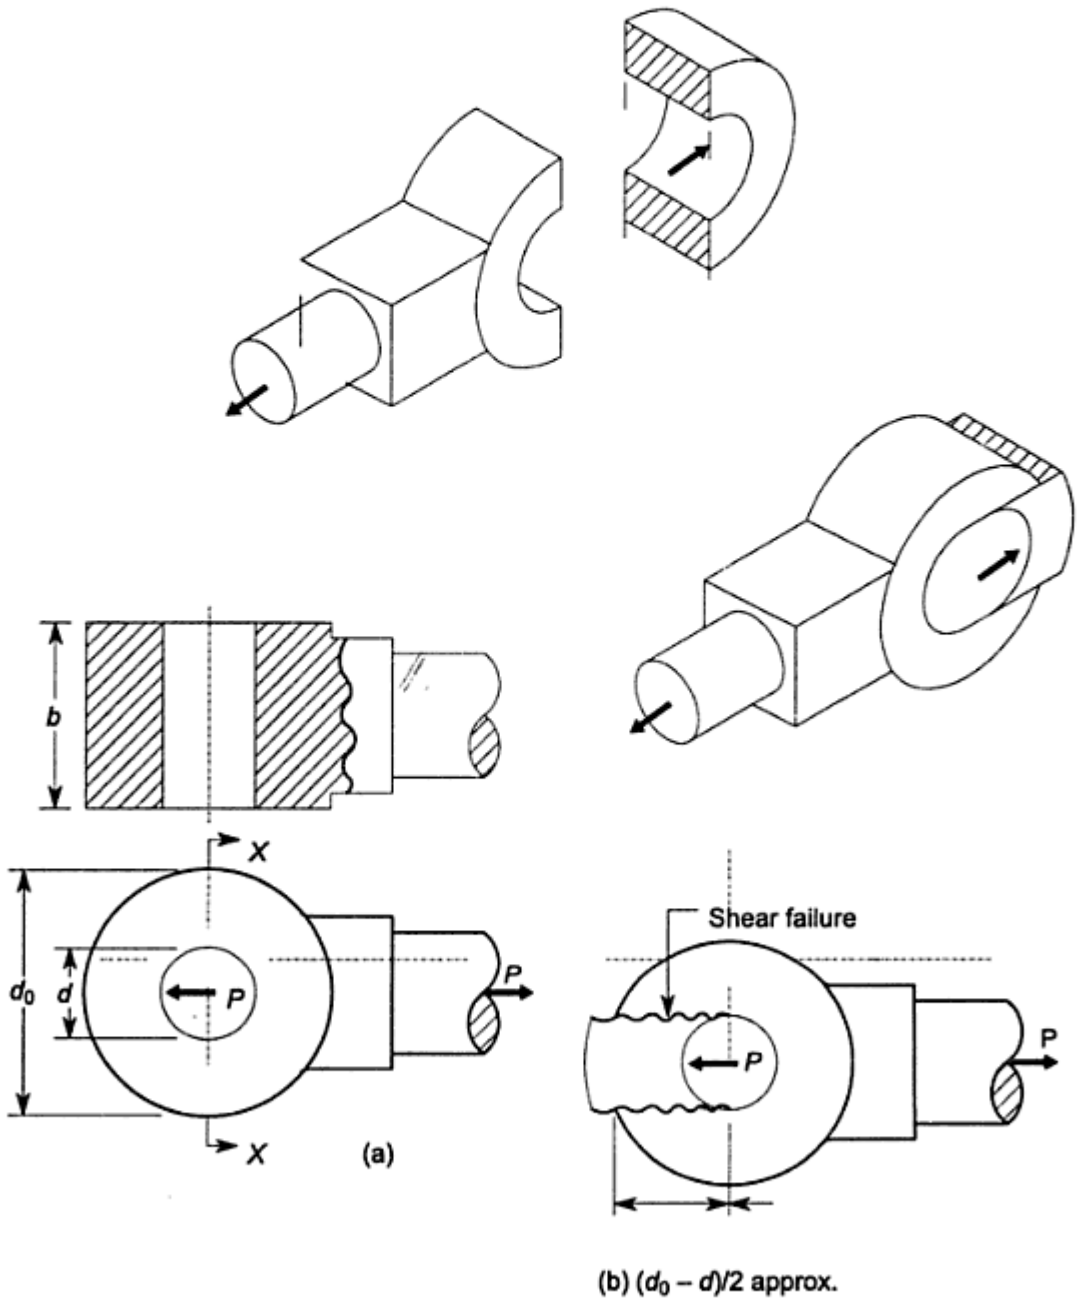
(a) Tensile Failure of Eye (b) Shear Failure of Eye
